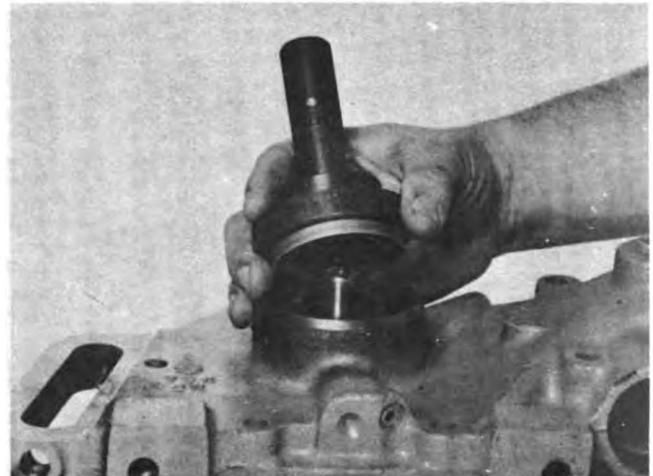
(N10890). Install The Seal Into The Housing.
